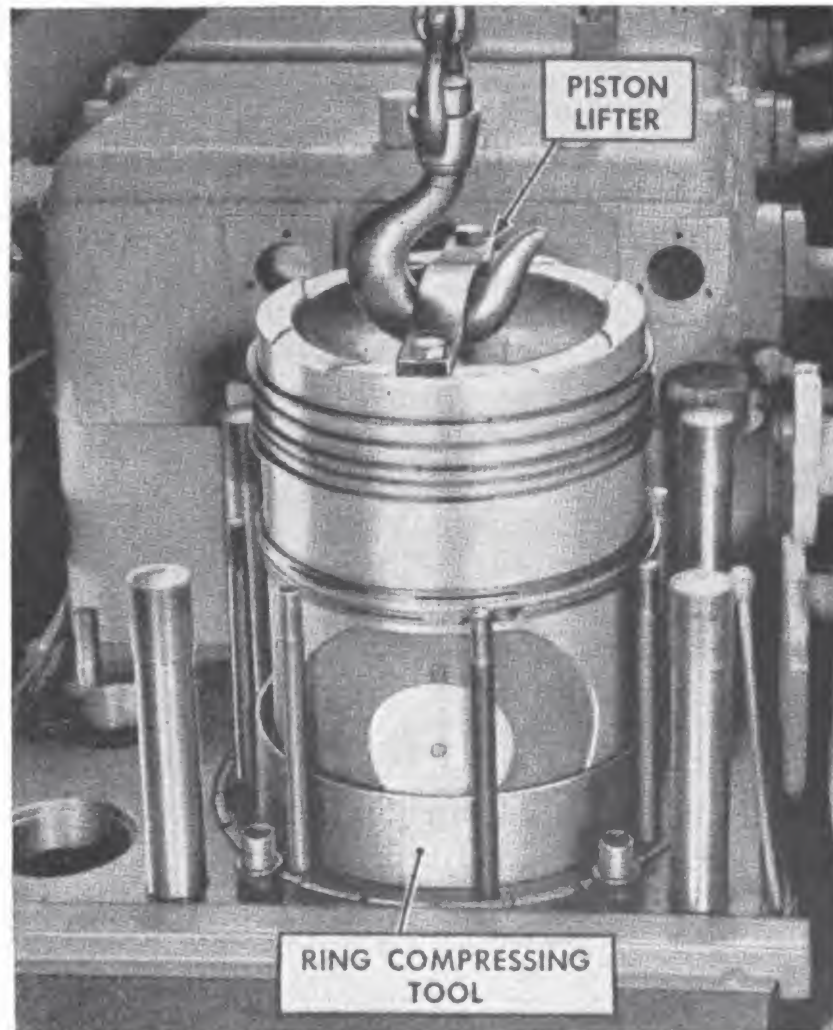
Installing a piston in a cylinder bore with funnel-type ring compressor.
